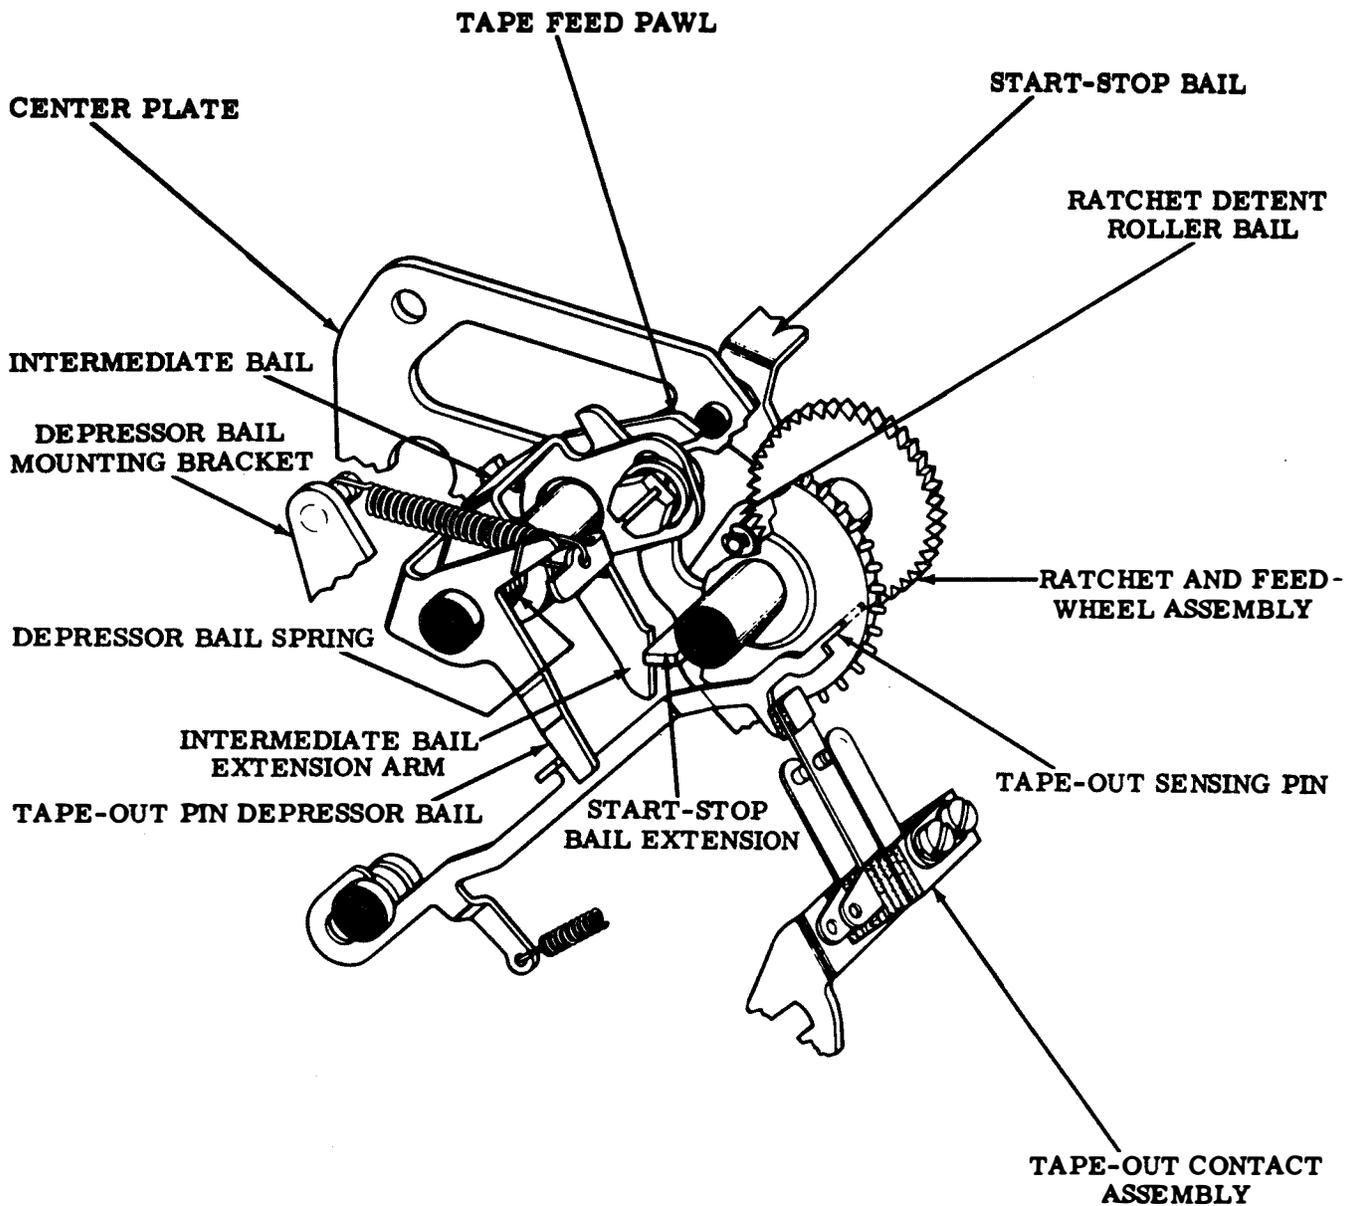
Freewheeling and Tape-Out Mechanisms
